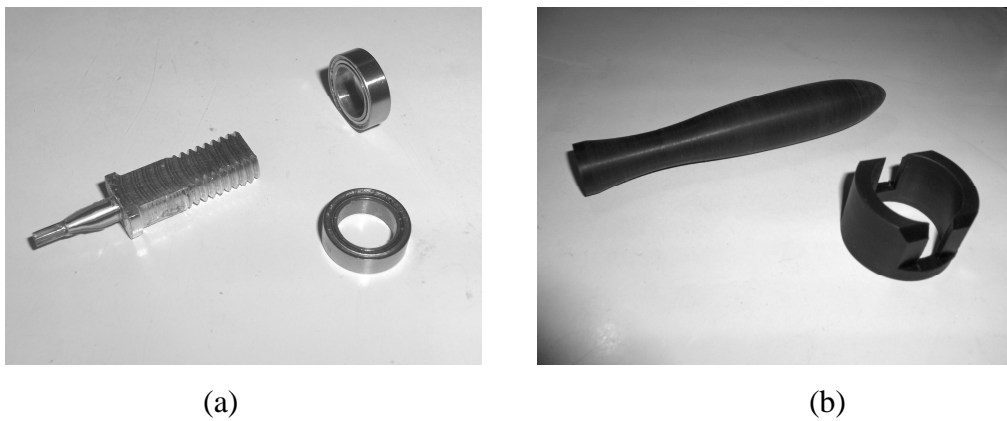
Link 3: (a) Shaft and bearings, (b) Link 3
